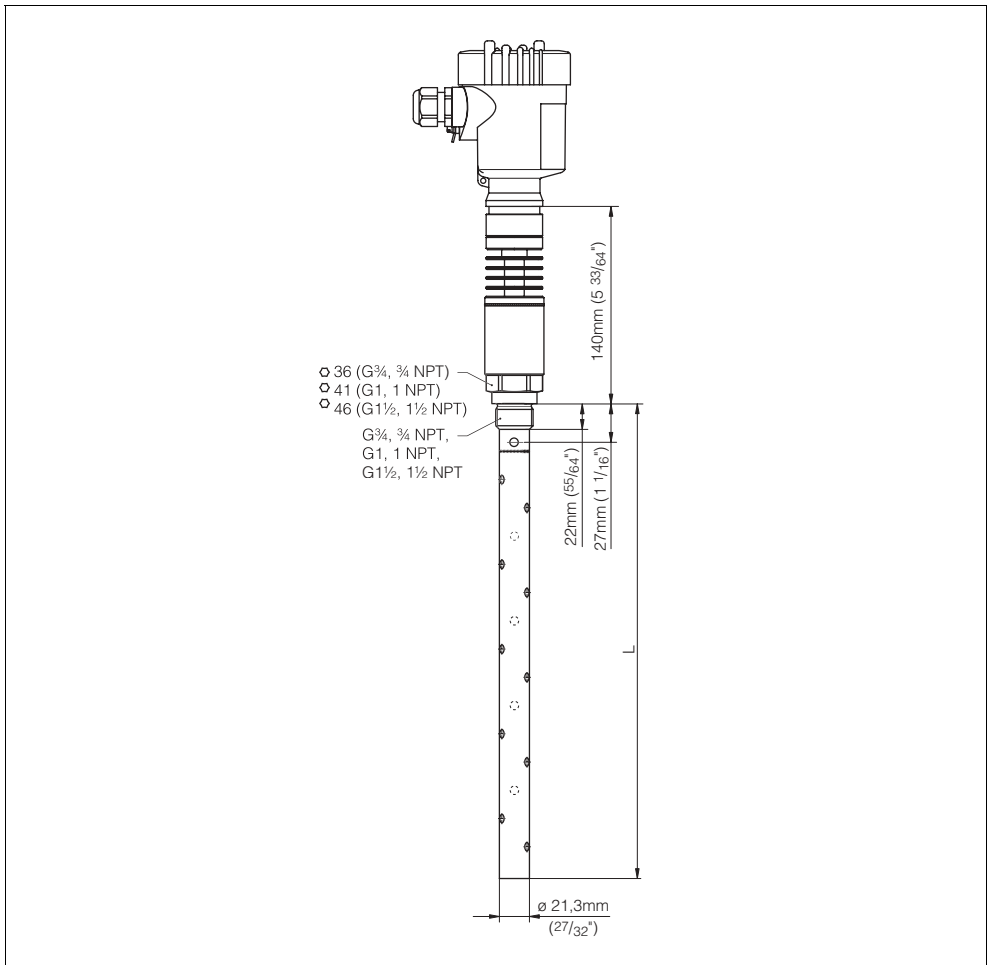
KSR-GT 666 (-20° ... +250°C) - coax version with thread
